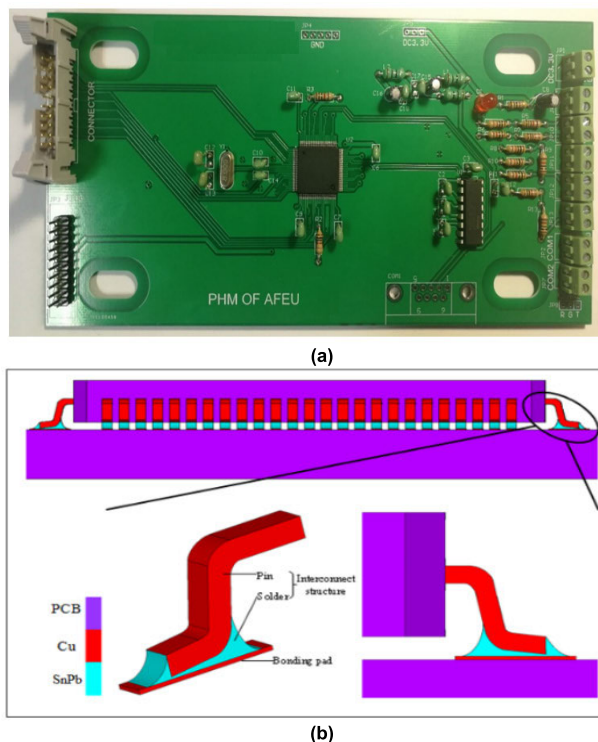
(a) Test piece. (b) QFP solder joint.
